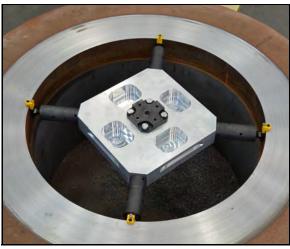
CHUCK CENTERED IN THE FLANGE
